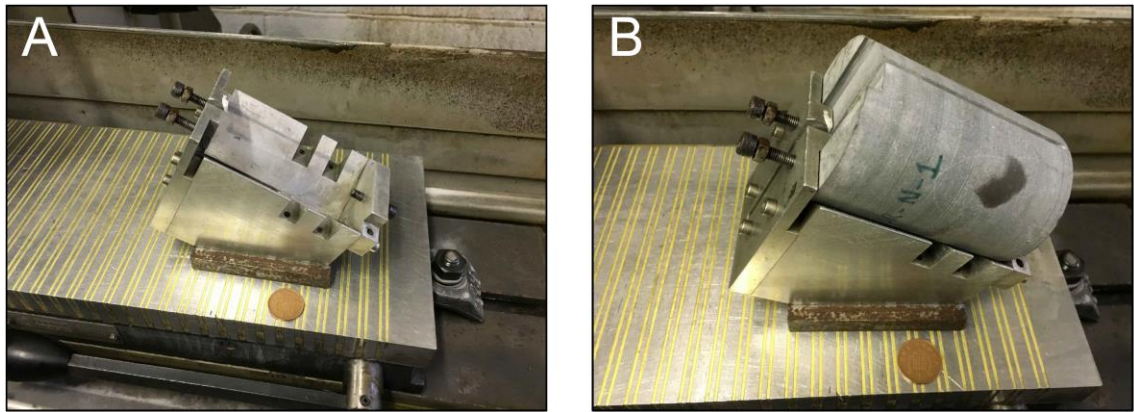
(A) Jig used for grinding in the chevron notch in the short rod sample (B) and with sample mounted. One pence piece for scale.
